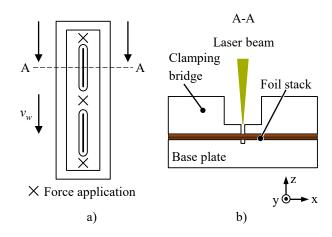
Schematic drawing of the clamping device: a) top view, b) sectional view
